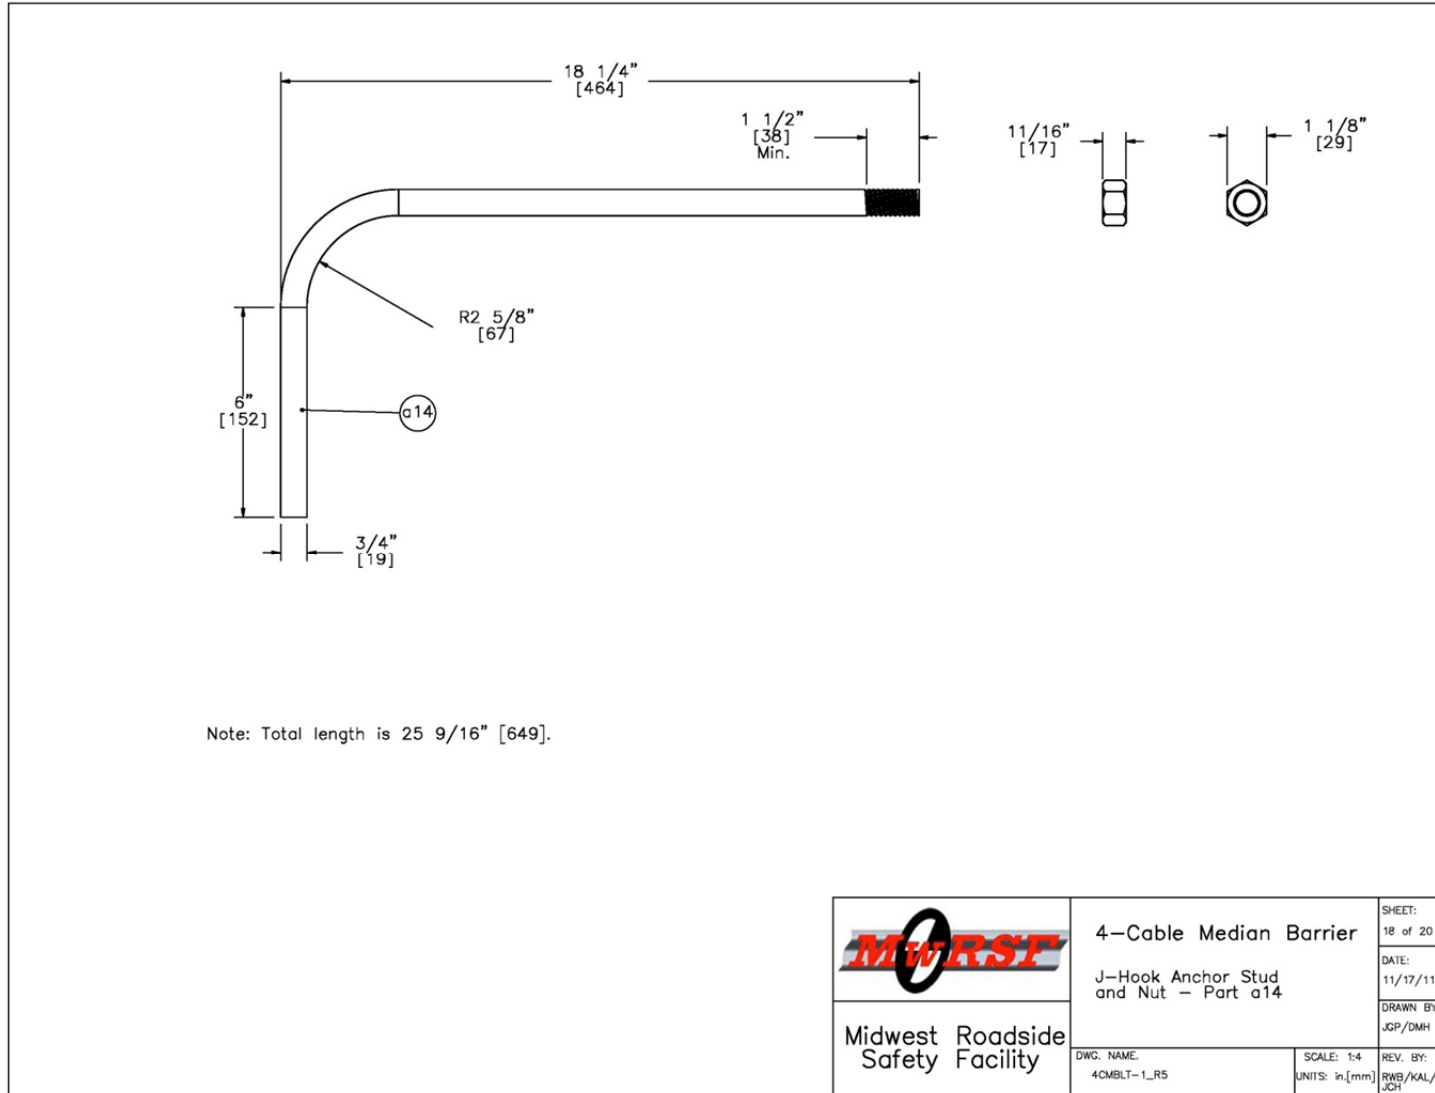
Anchor Stud Detail, Test No. 4CMBLT-1
